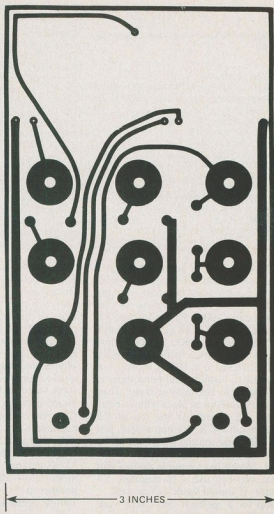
BOTTOM OF BOARD shows where jacks J1-J9 are mounted.
